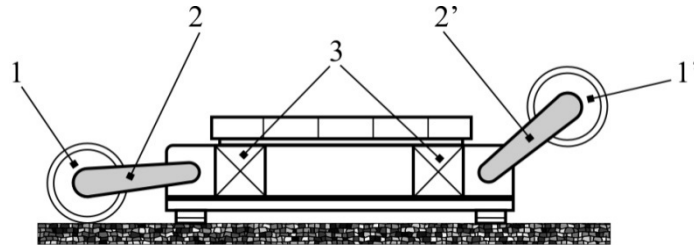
Components of a Longwall Mining Shearer 1, 1' - Drum-type cutting mechanism, 2, 2' - Drum support arms, 3 - Electric motors driving the drums
